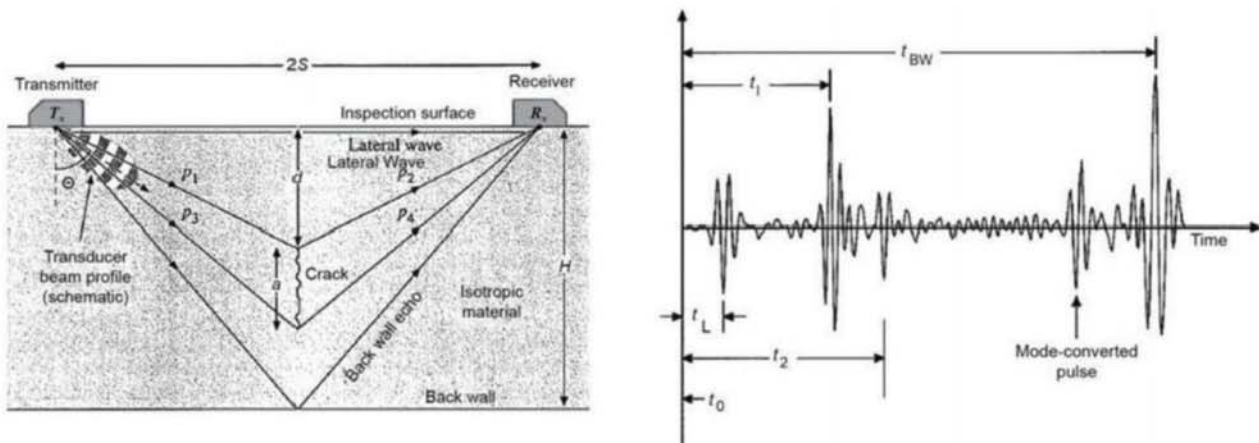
Typical Transducer Arrangement for TOFD Inspection of Welds[29]
